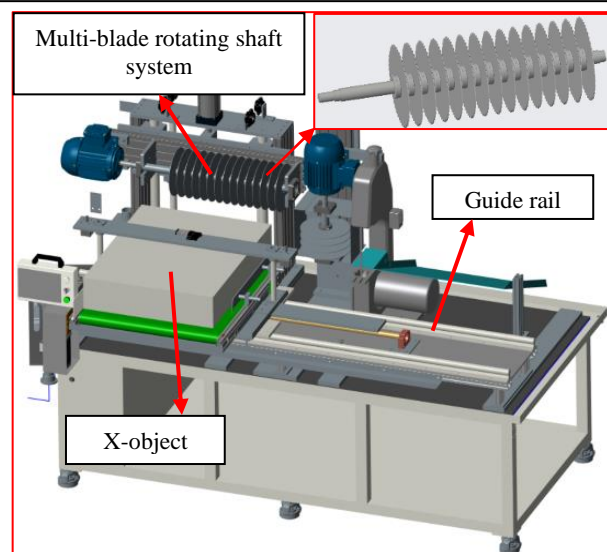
3D Drawing of multi-blade cutting machine for X-precision objects.
